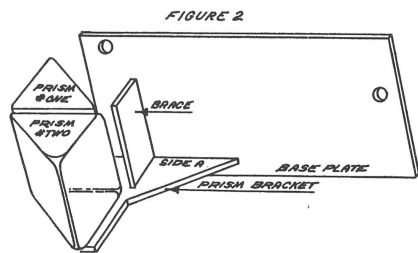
Method of assembling the various pieces plus prisms which go together to form the complete offset viewfinder auxiliary. Top prism bracket has been omitted here to show position of prisms.
